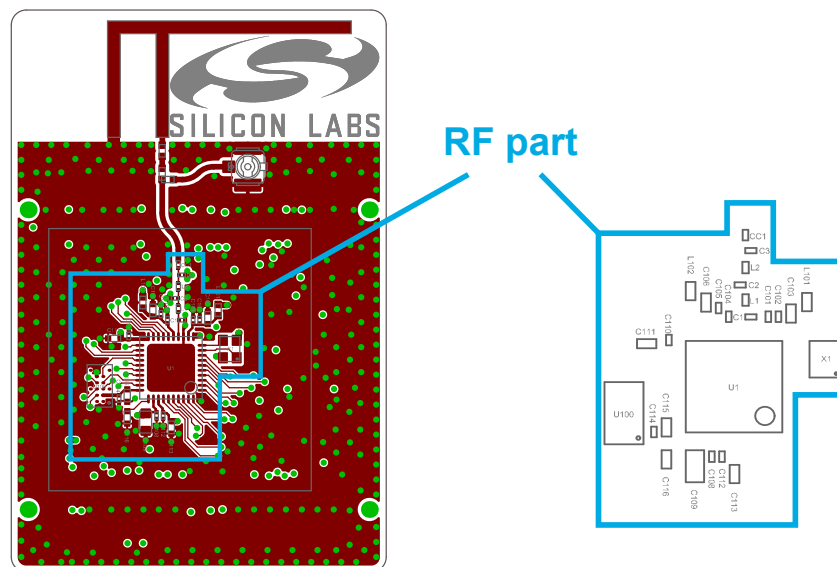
Top Layer of BRD4408A (SiXG301) Radio Board (Left Side) and Assembly Drawing of the RF Part (Right Side)
